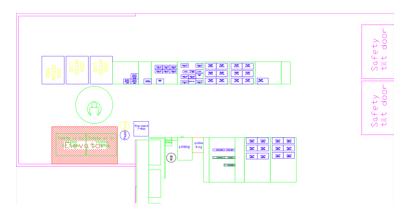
Future Layout of the mezzanine MIKO 1 workstation.
